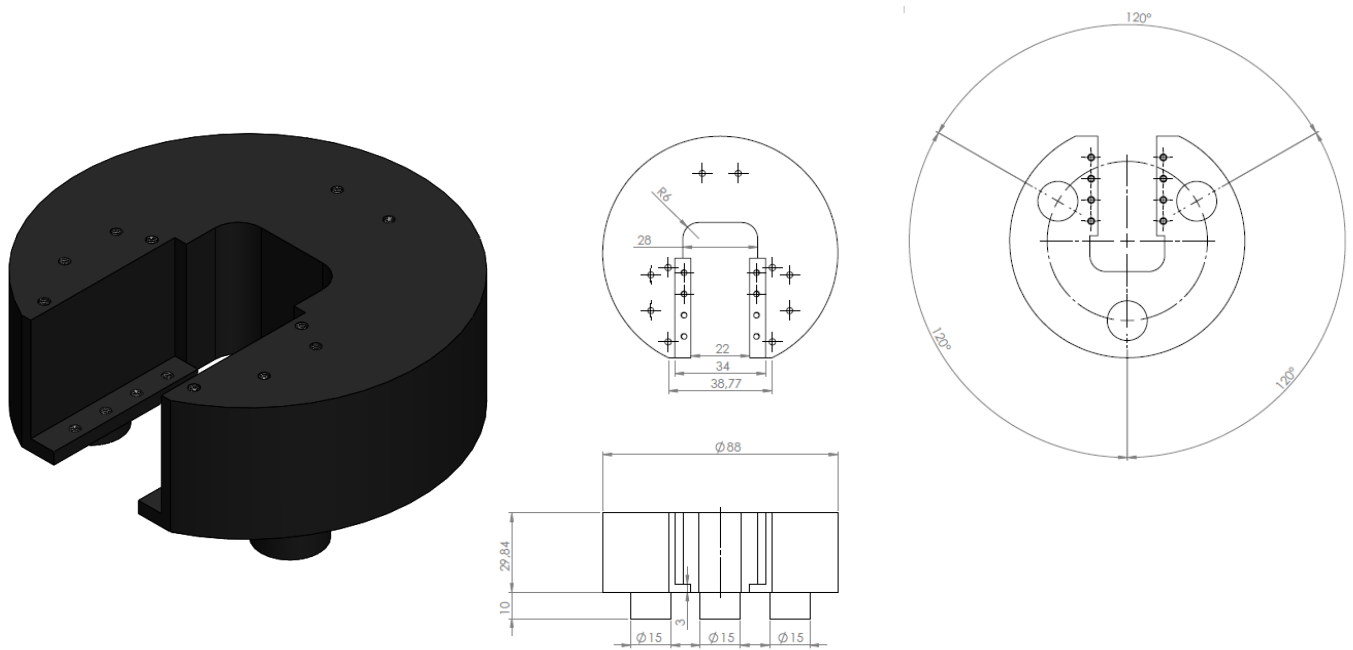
Technical Drawing and Trimetric Views of the Base Retainer
